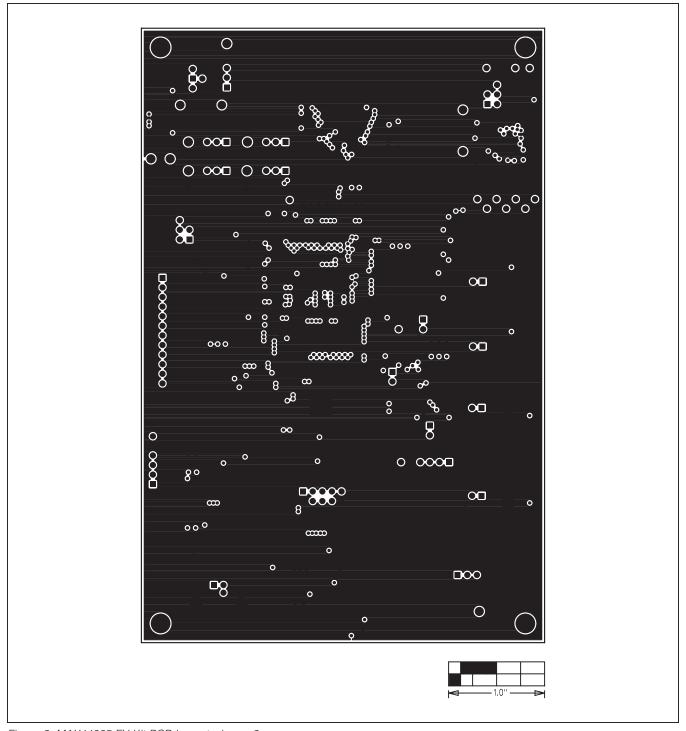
MAX44005 EV Kit PCB Layout—Layer 2
